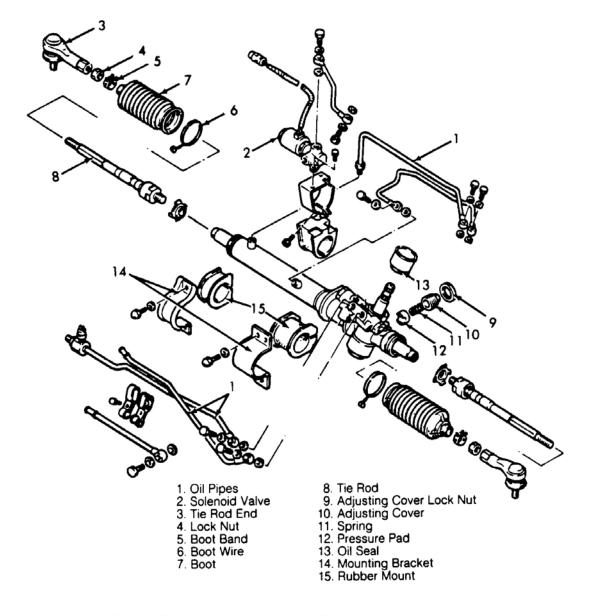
Engine Speed Sensing Rack & Pinion Steering Gear (MX6 & 626) Courtesy of MAZDA MOTORS CORP.
